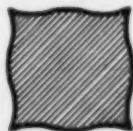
Section of a Tool Steel Which Did Not Harden Through After Repeated Heating and Cooling.
